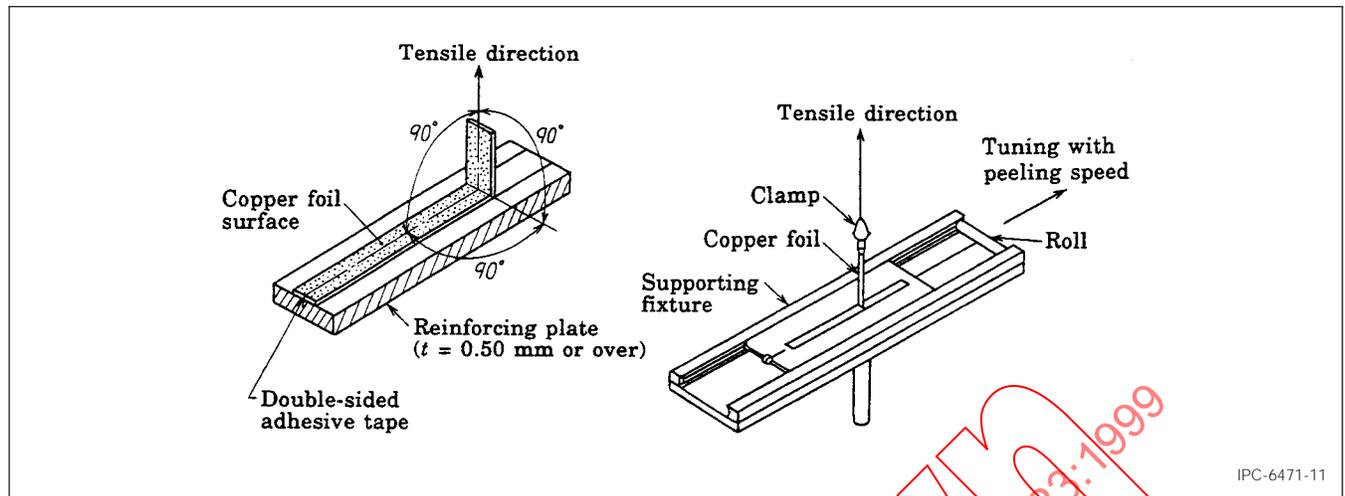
Slide Type Supporting Fixture for Measurement of Peel Strength by Method A (Peel Off in 90° Direction)
